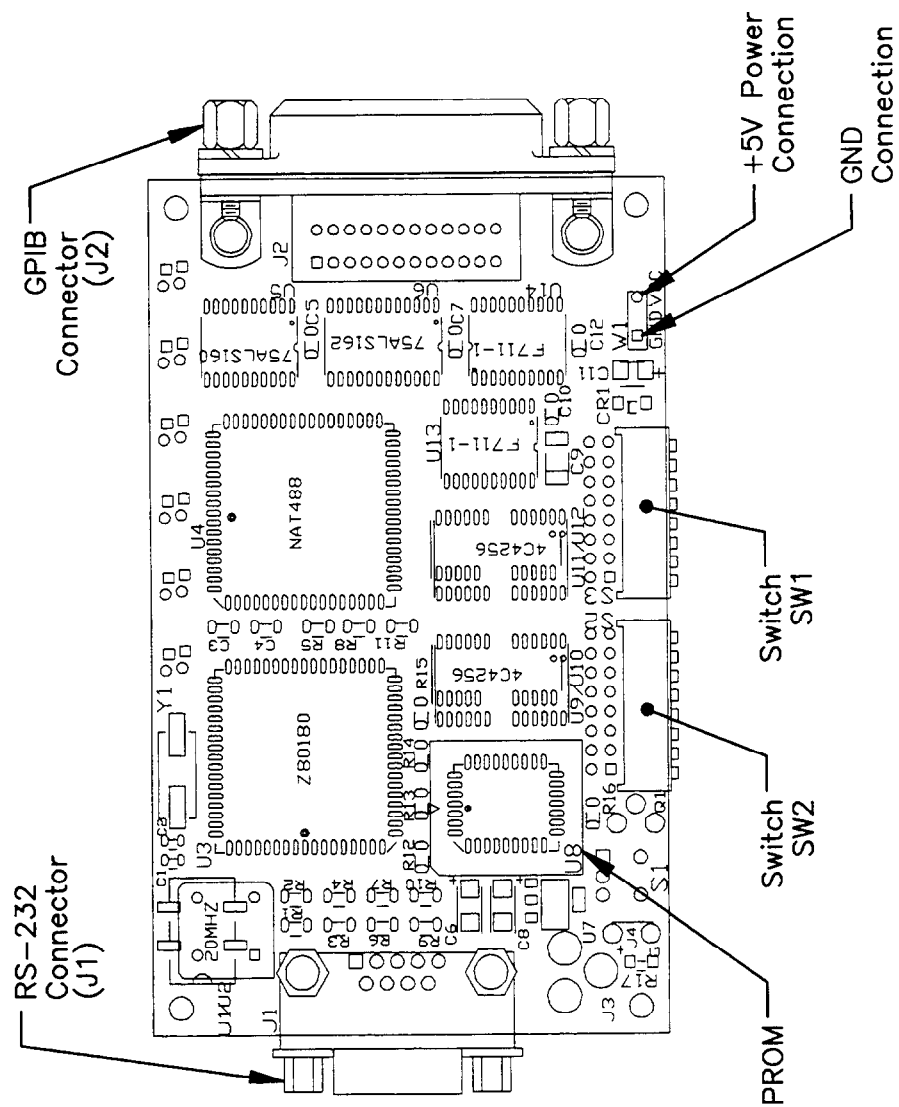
Component on the Bottom Side of the Circuit Card Assembly
